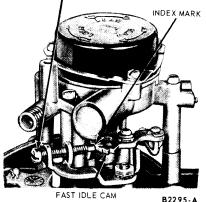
Engine Fast (Cold Engine) Idle Speed Adjustment
